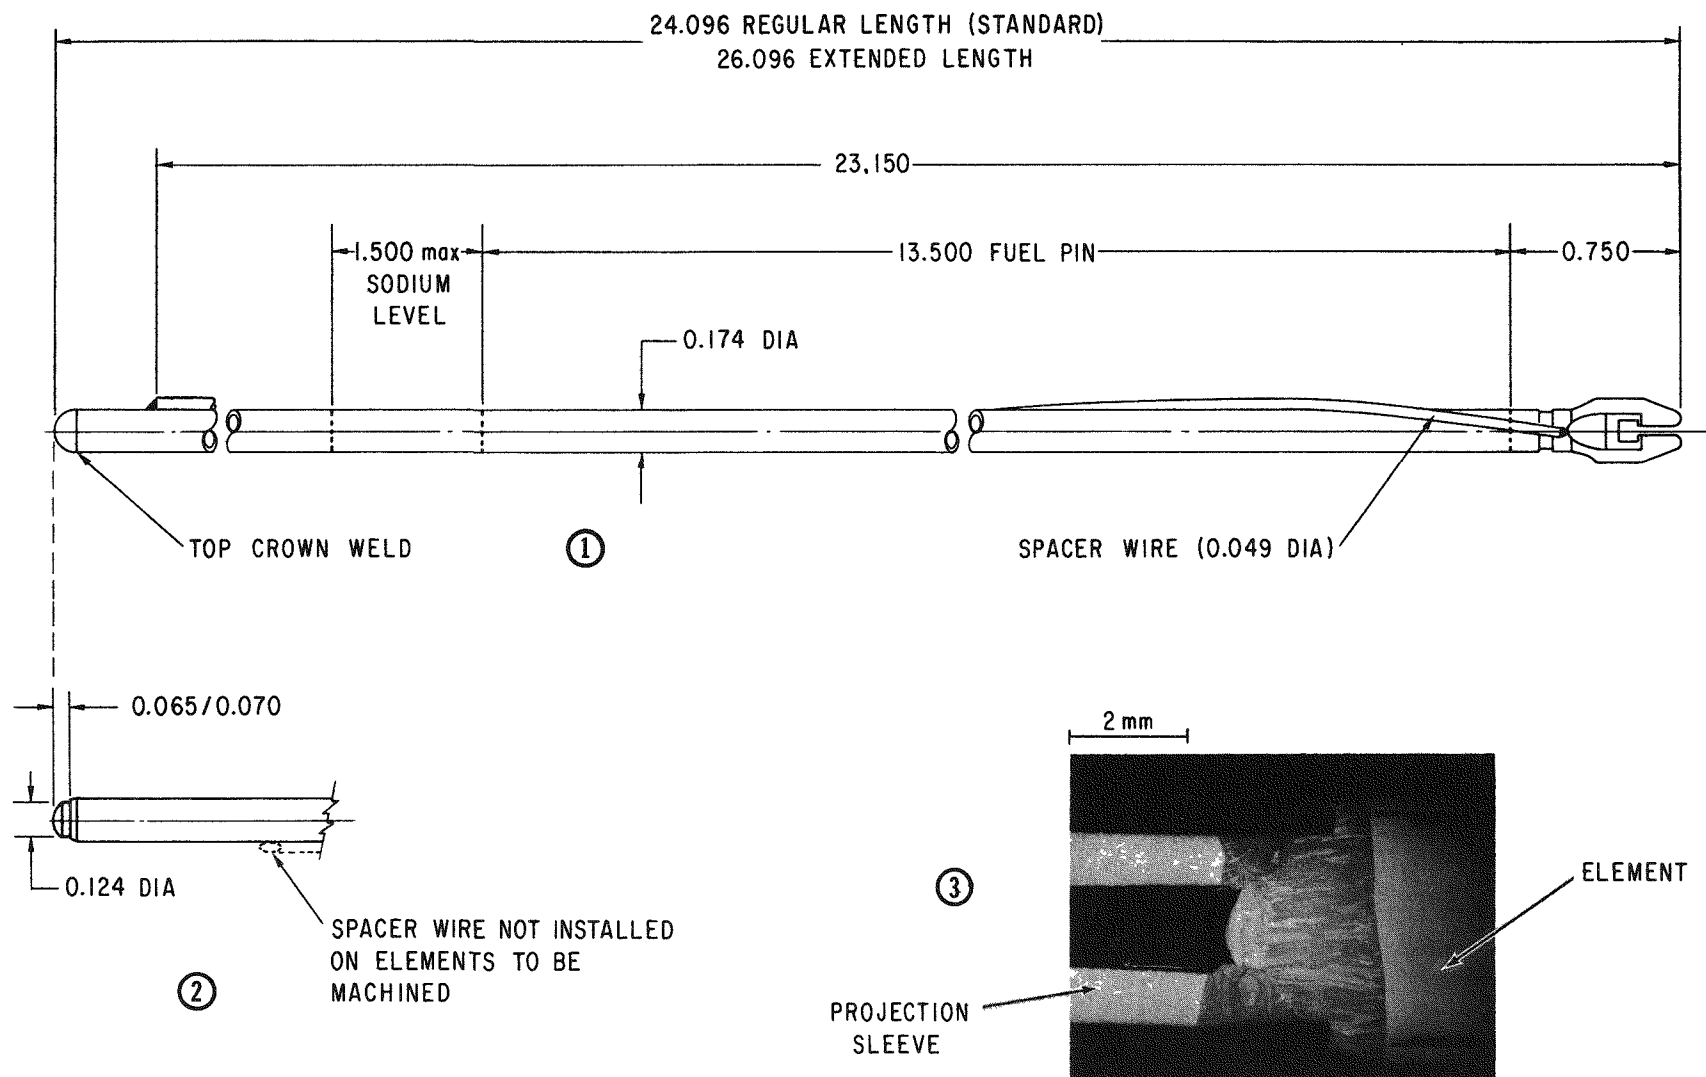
EBR-II Mark-II Driver-fuel Element and Modifications. 1. Standard Mark-II element (regular and extended length). 2. Crown weld machined for welding of projection sleeve to fuel element (regular length only). 3. Photomicrograph of weld to fuel element. All dimensions in inches; 1 in. = 25.4 mm.
